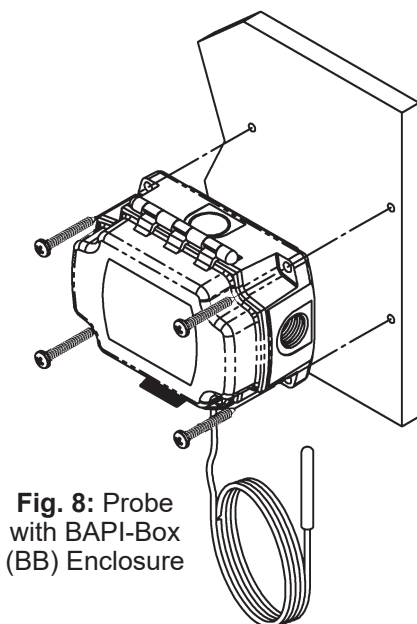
Probe with BAPI-Box (BB) Enclosure
